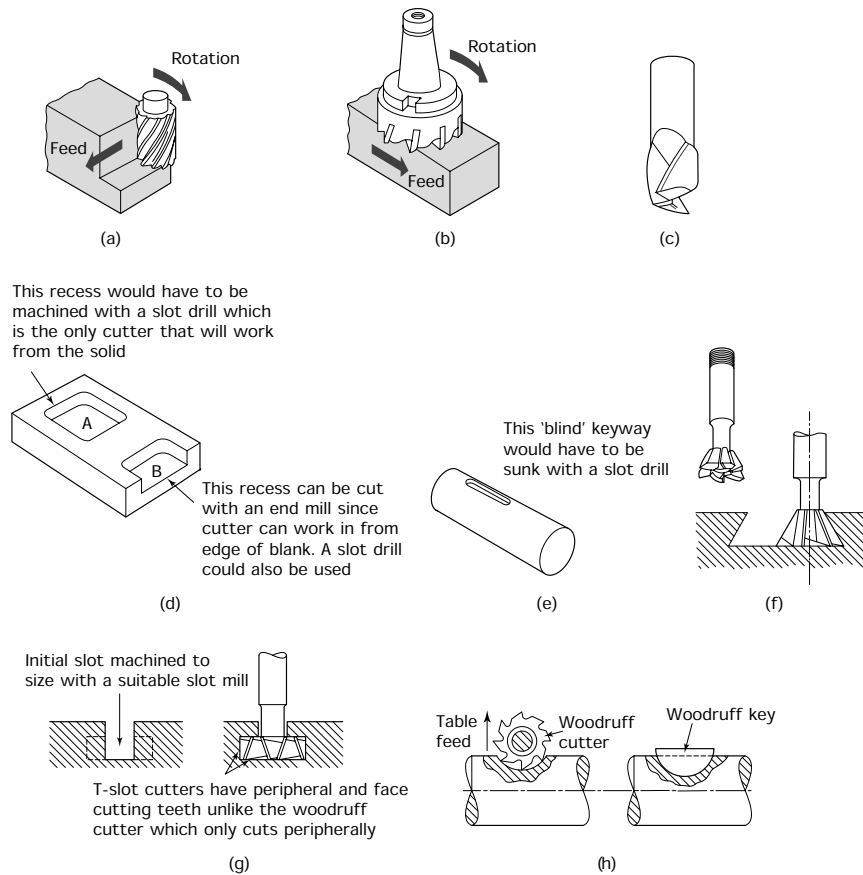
Vertical milling machine cutters and the surfaces they produce: (a) end milling cutter; (b) face milling cutter; (c) slot drill; (d) recess A would need to be cut with a slot drill because it is the only cutter that will work from the centre of a solid; recess B could be cut using a slot drill or an end mill because it occurs at the edge of the solid; (e) this blind keyway would have to be sunk with a slot drill; (f) dovetail (angle) cutter; (g) T-slot cutter; (h) Woodruff cutter
